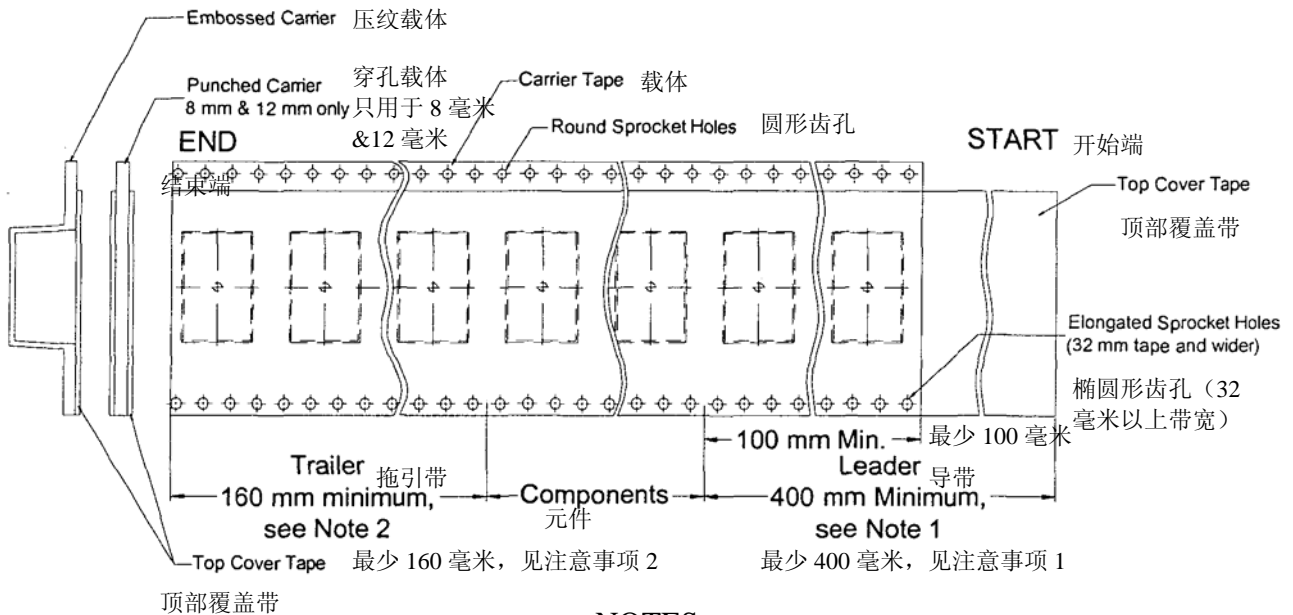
Tape leader & trailer dimensions for punched and embossed carrier 图 13 – 穿孔和压纹载体的导带&拖引带尺寸
